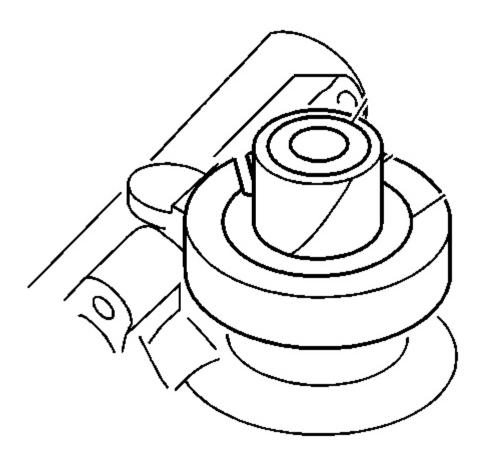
Power Steering Pump Drive Shaft Seal Courtesy of GENERAL MOTORS CORP.
